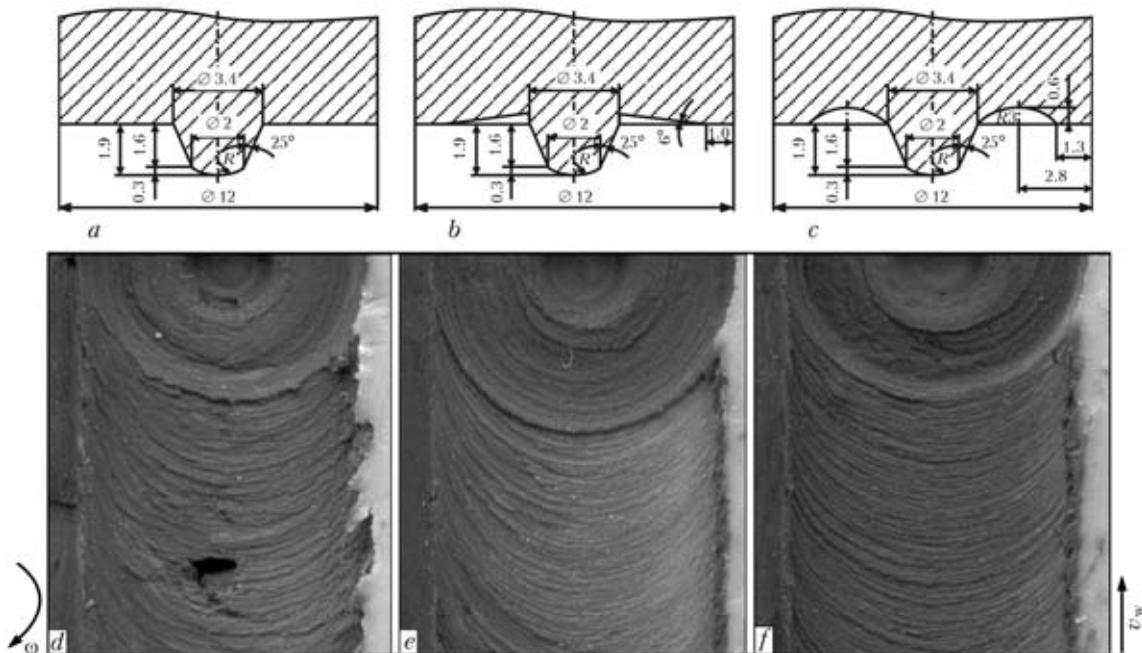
Schematics of working part of tools for FSW with a flat end face surface of the shoulder (a), conical (b) and semi-spherical (c) groove on it and appearance of face surface of welds made using the appropriate tools (d-f)
